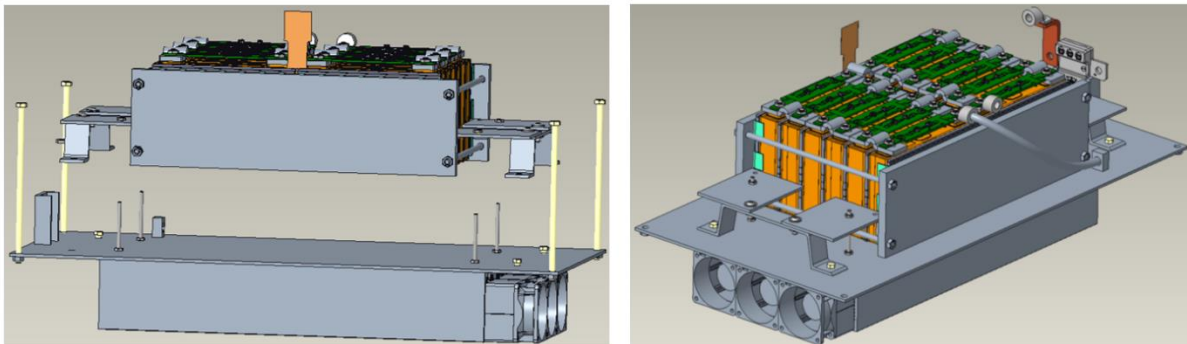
Integration of the Heat Sink with Cell-Stack using Side Holders and Base Plate.
